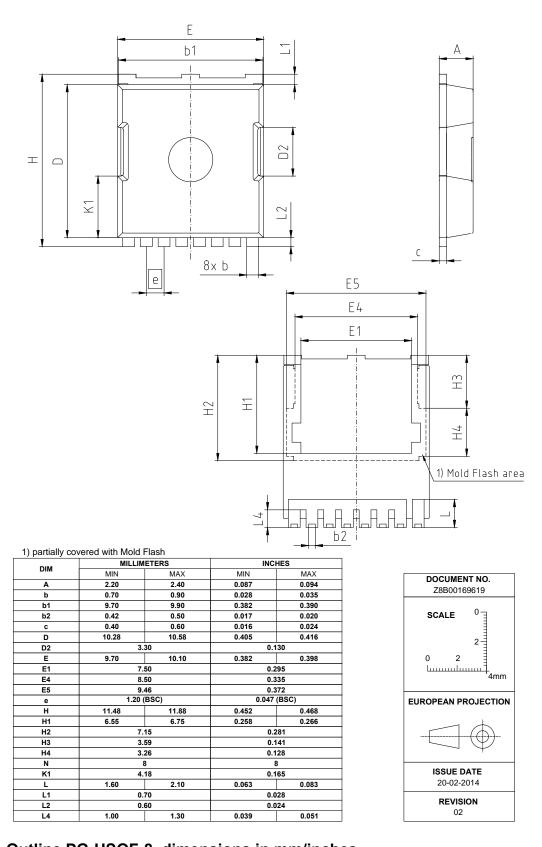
Outline PG-HSOF-8, dimensions in mm/inches
